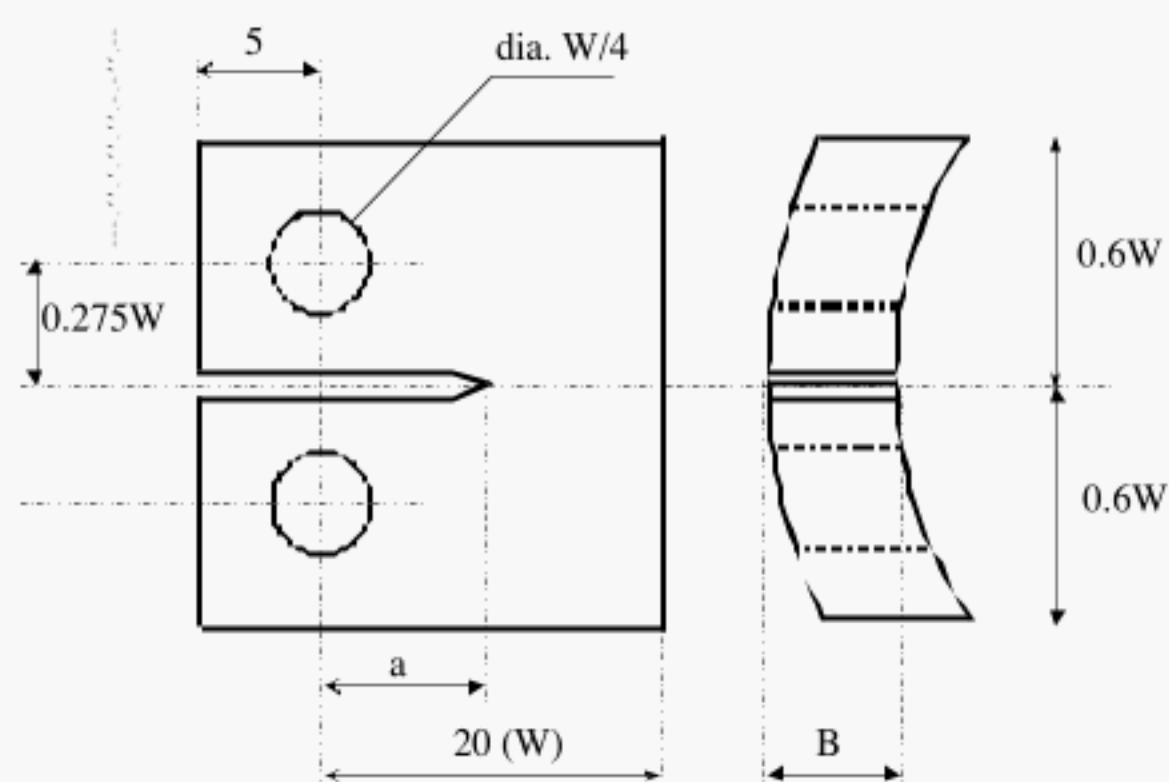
Projected and side views of compact tension testpiece machined from pipe, with notch in axial direction; all dimensions in mm; B = thickness.
